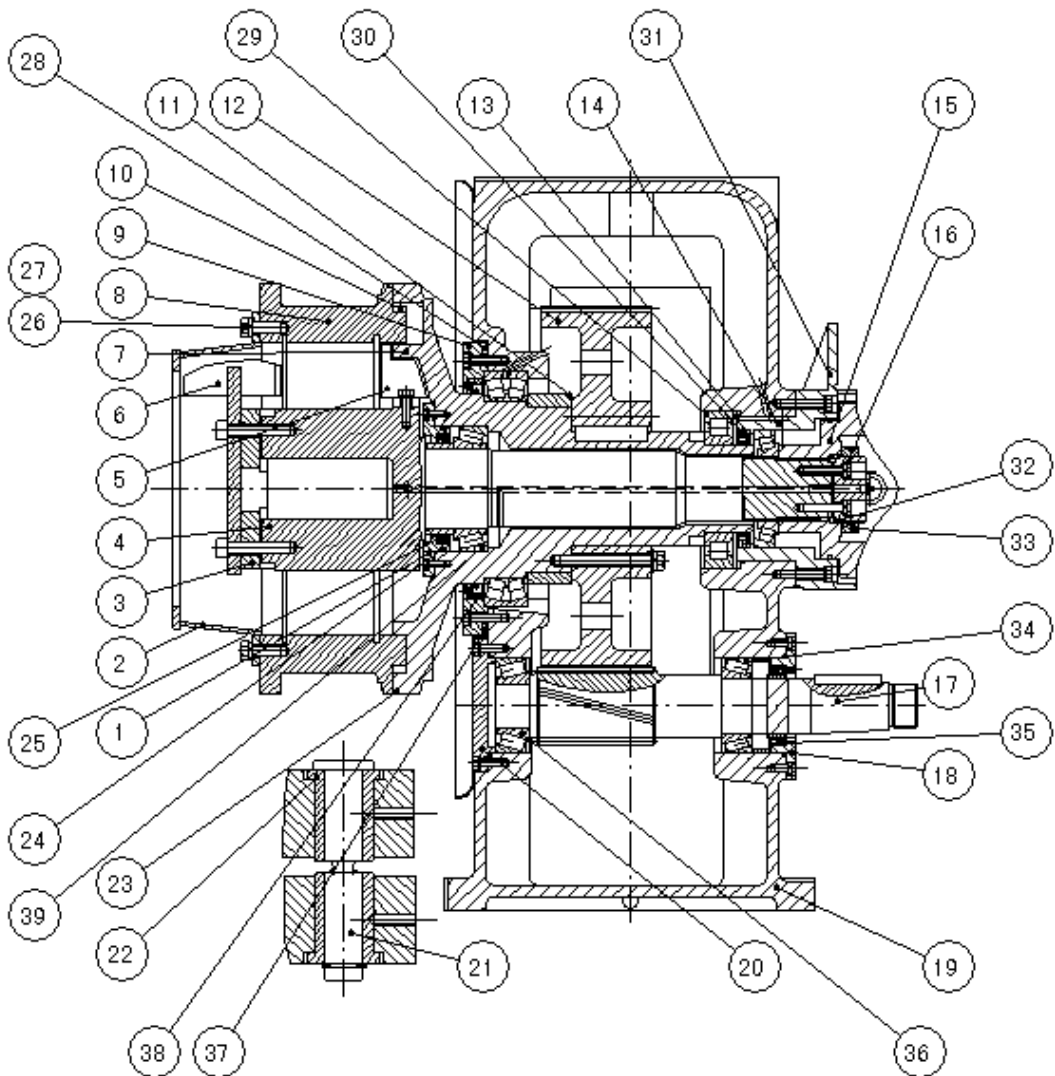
SZLH508 PELLET MILL GEARBOX STRUCTURE
